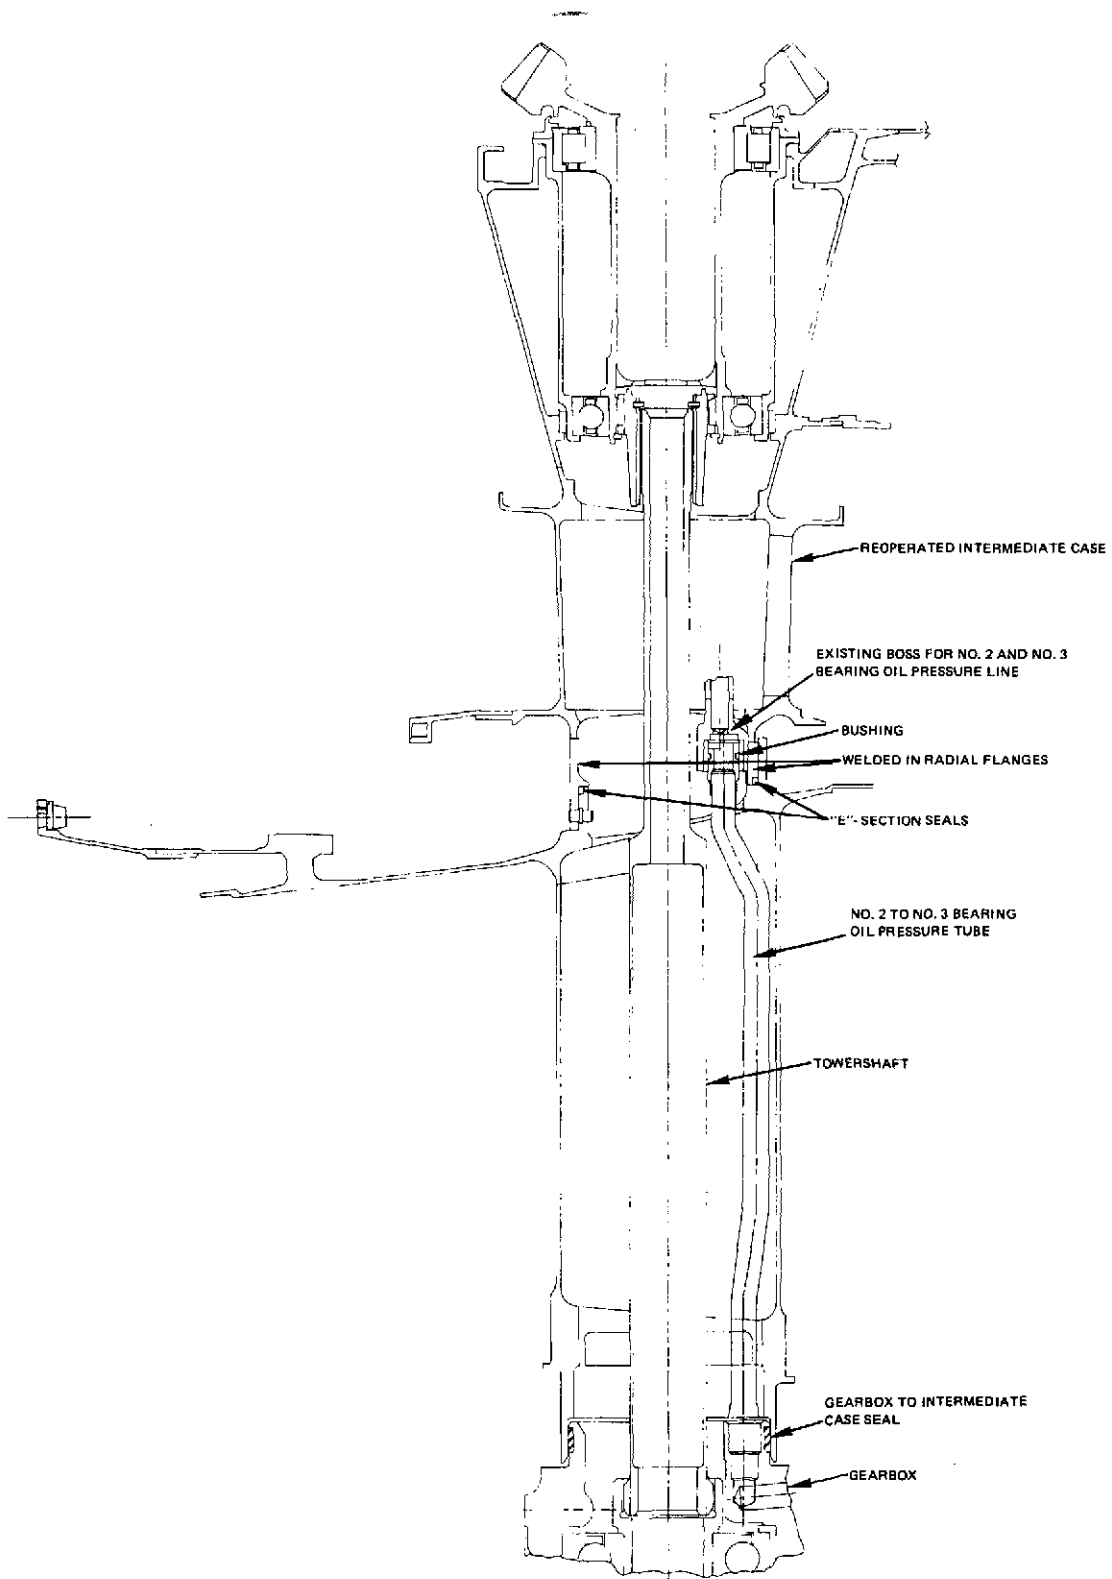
JT8D-100 Intermediate Case - Towershaft Cross Section
